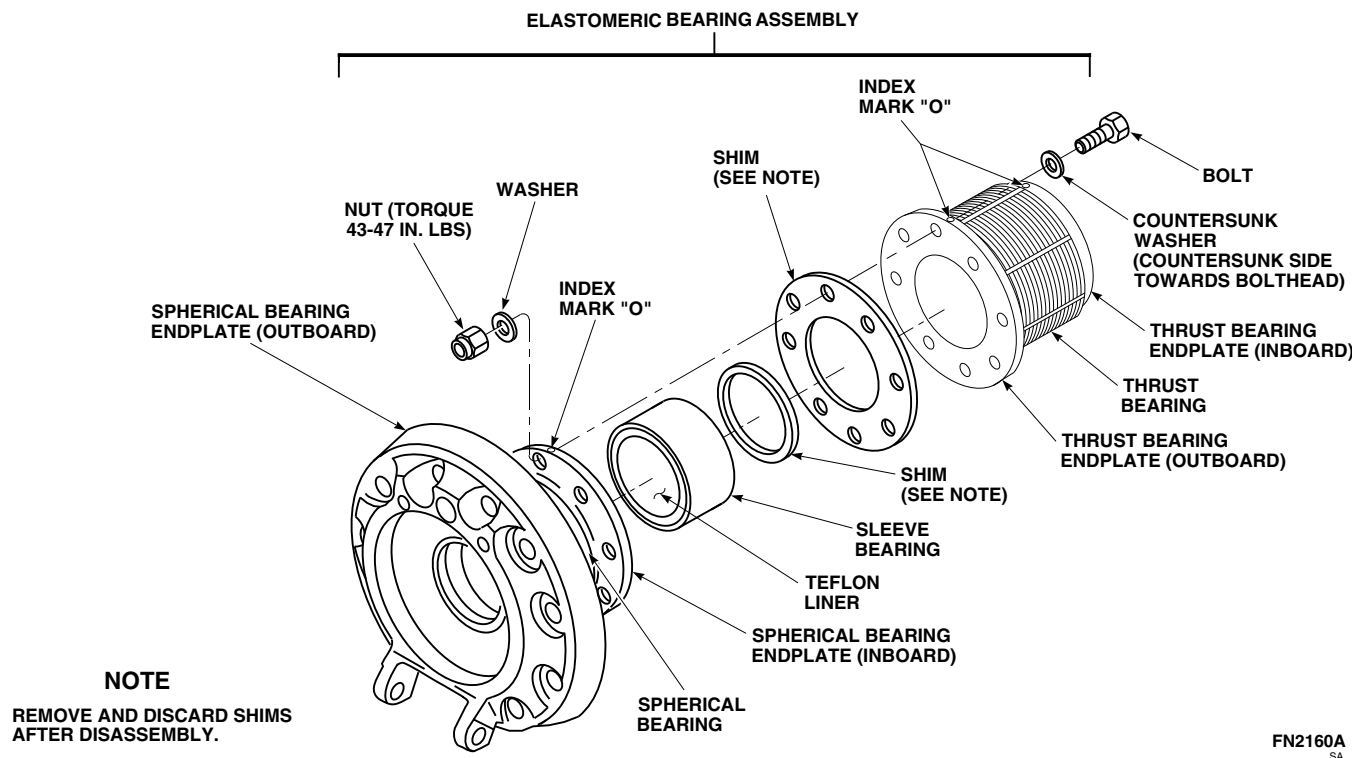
REPAIR SPINDLE ELASTOMERIC BEARING ASSEMBLY (BENCH)
